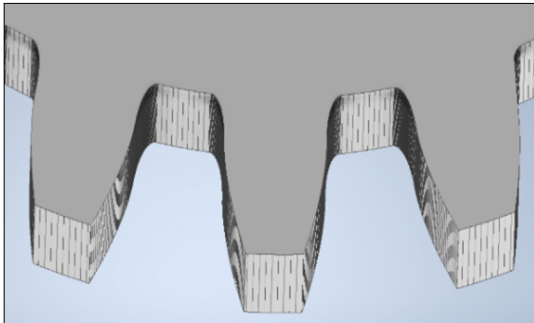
$Z=27 \xi=-0.4$ Involute gear.
